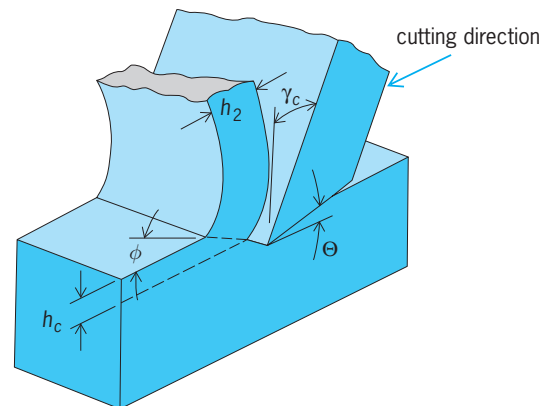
Orthogonal cutting process: a simplified view of machining. (After J. A. Schey, *Introduction to Manufacturing Processes*, McGraw-Hill, 1977)
